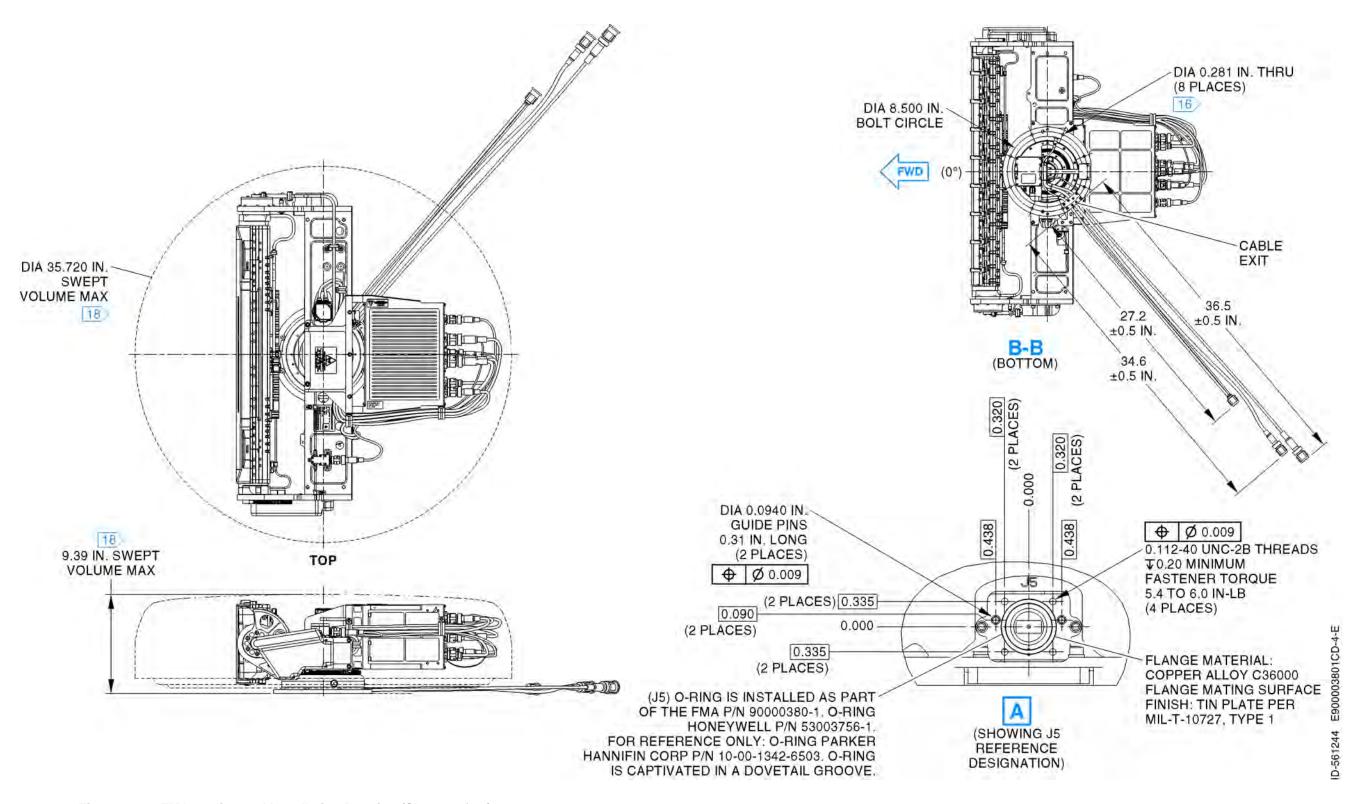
FMA Outline and Installation Drawing (Sheet 4 of 12)
